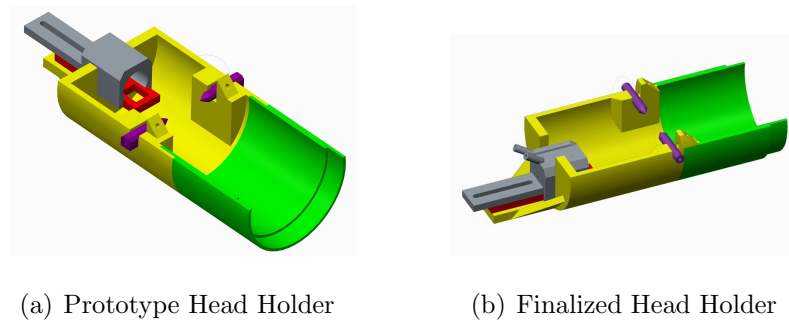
3D CAD design of custom microCT rat head holder. a) initial design of head holder, b) final design of head holder. Parts are color coded as follows: bite bar (red), nose cone (grey), head holder body (yellow), ear bars (purple), bed extensions (green).
